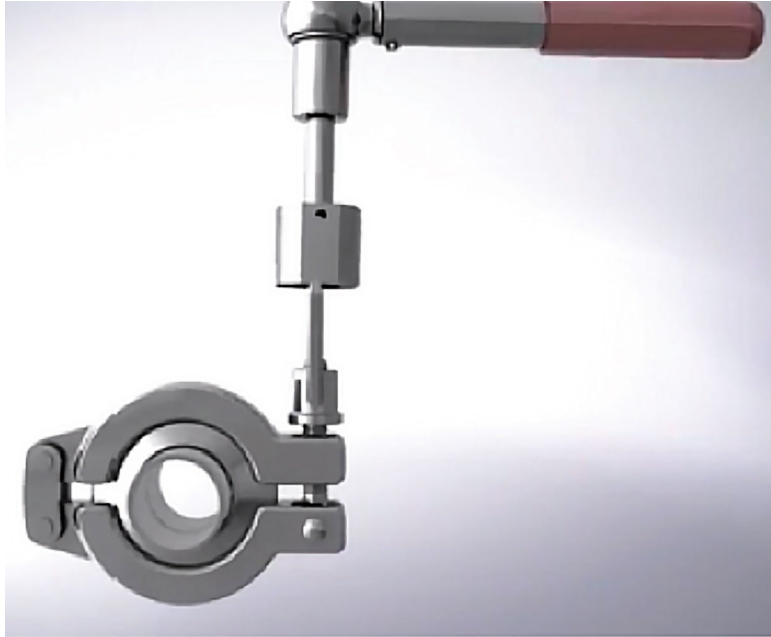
Use of an approved torque tool will prevent overtightening the clamp.
